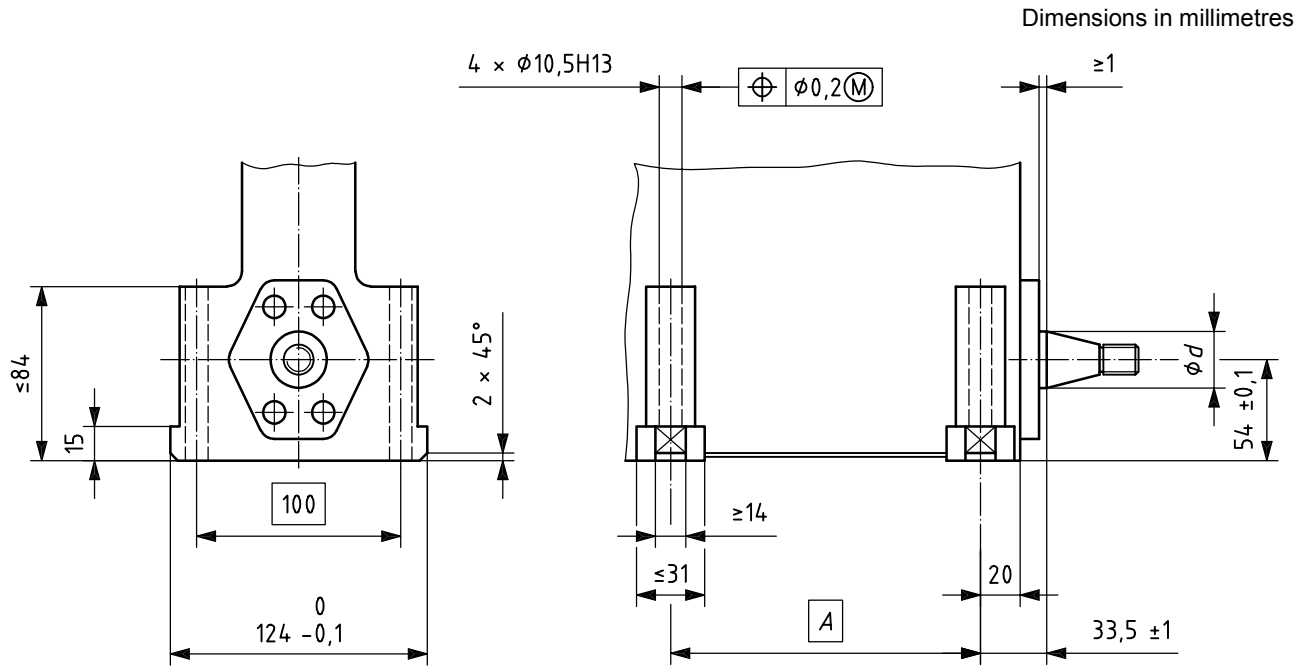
Base-mounted in-line fuel injection pump — Type 4
